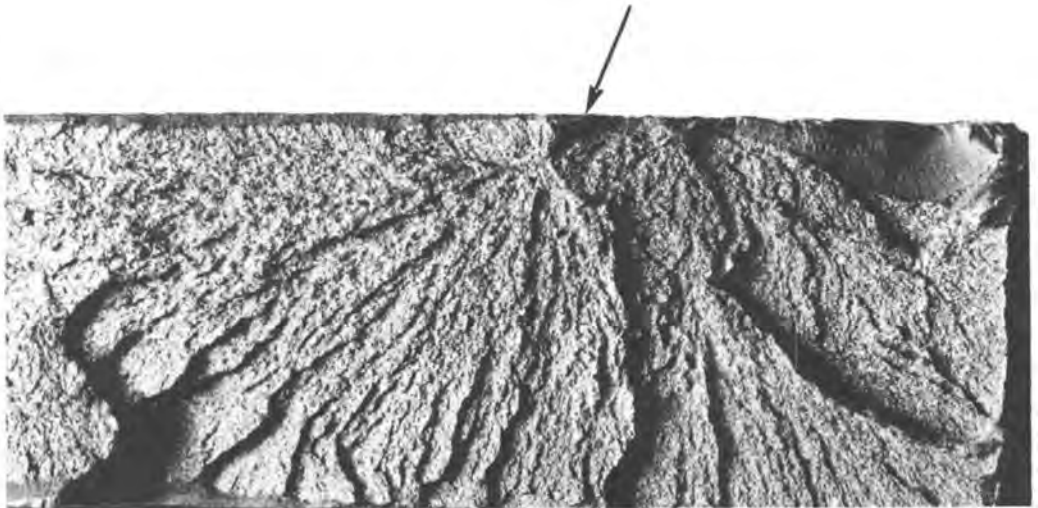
Origin (at arrow) of a single-load brittle fracture that initiated at a small weld defect. Note also a fatigue fracture in the upper right corner. Radial ridges emanate from the origin in a fan-shaped pattern. The brittle part of the fracture is bright and sparkling, in contrast to the dull appearance of the fatigue zone and the thin shear lips at top and bottom surface.
